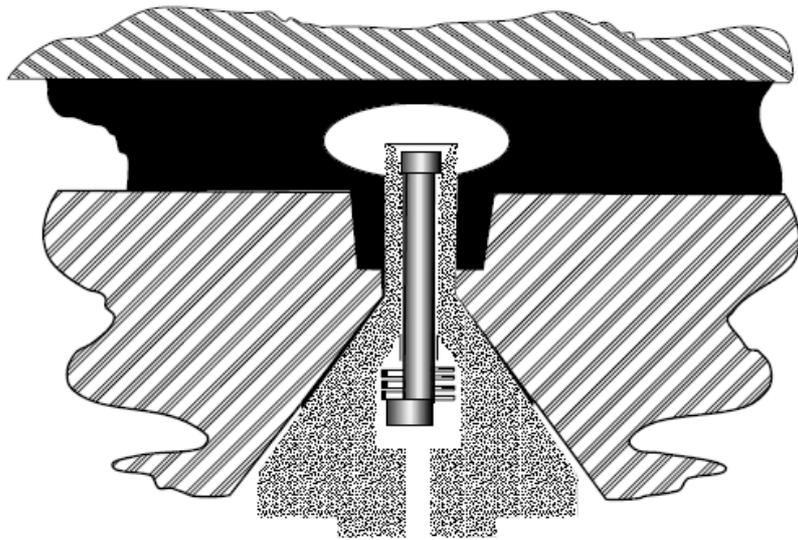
Gas injection pin mounted in the mold cavity.
